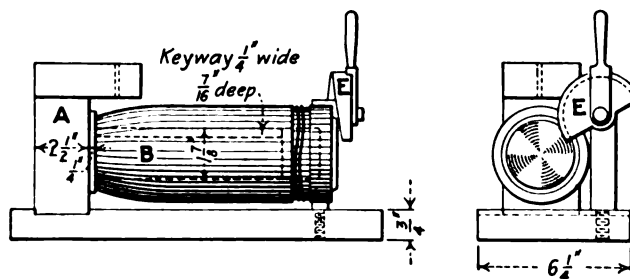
DRILL JIG FOR FIXING-SCREW HOLE
